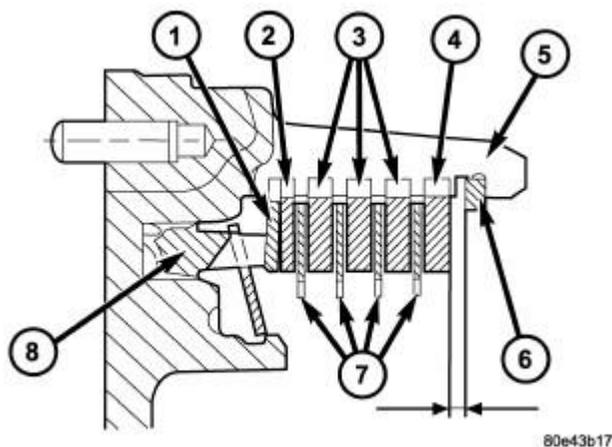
B1 Clutch Stack-Up - Double Sided Discs
